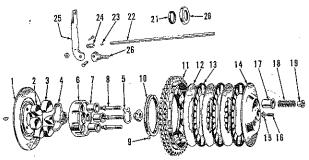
Exploded view of clutch assembly. Adjusting screw is shown at (16) and lock nut at (15).
